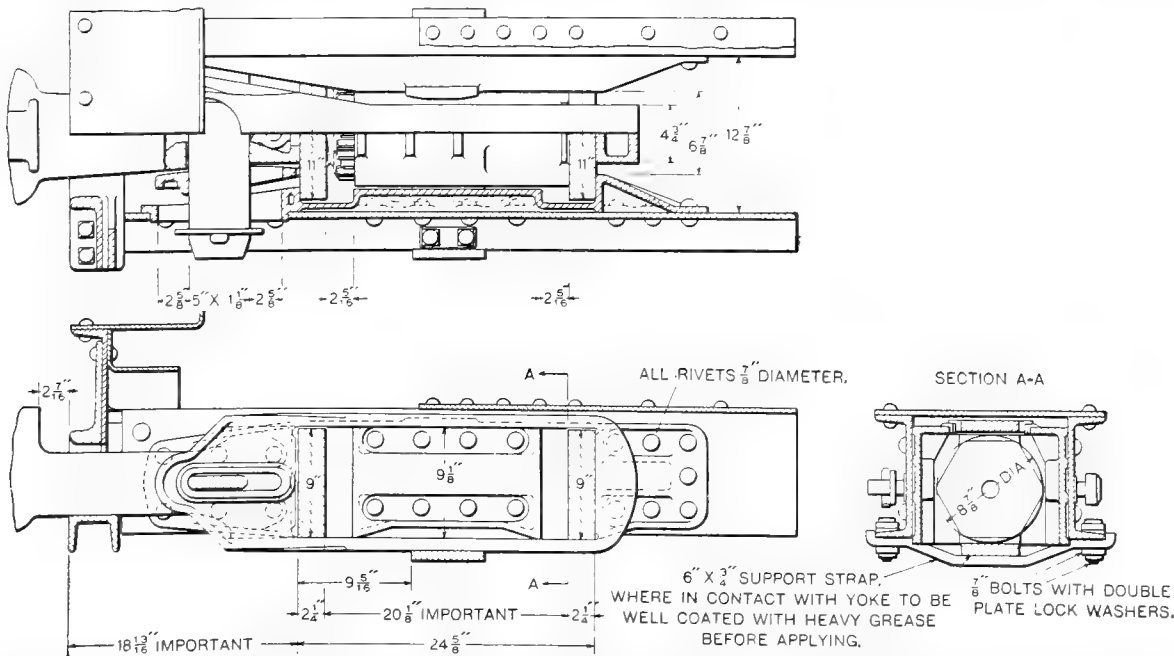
Westinghouse Type D-3 Friction Draft Gear for Steel Underframe Freight Cars, with Universal Draft Gear Attachment Company's Keyed Yoke and Continuous Draft Plates with Limiting Stops. Westinghouse Air Brake Company.
